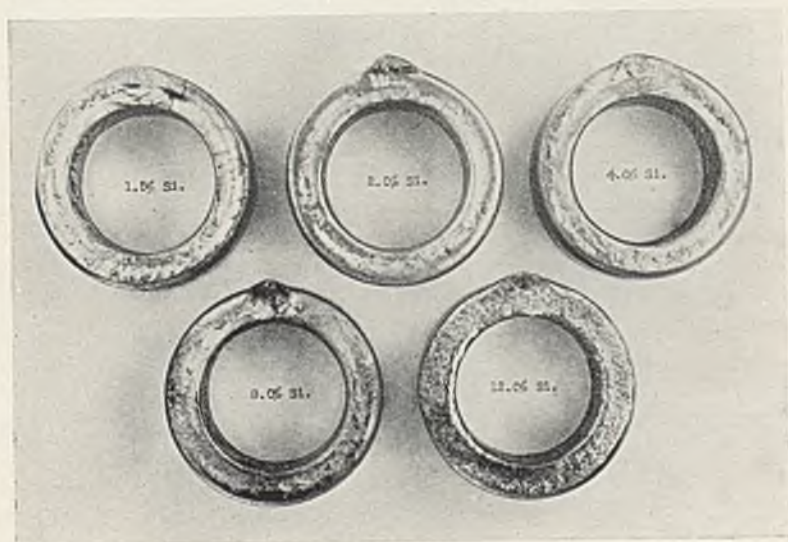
Cracking of Ring Castings in the Aluminium-Silicon Alloys. $\times \frac{1}{2}$.
